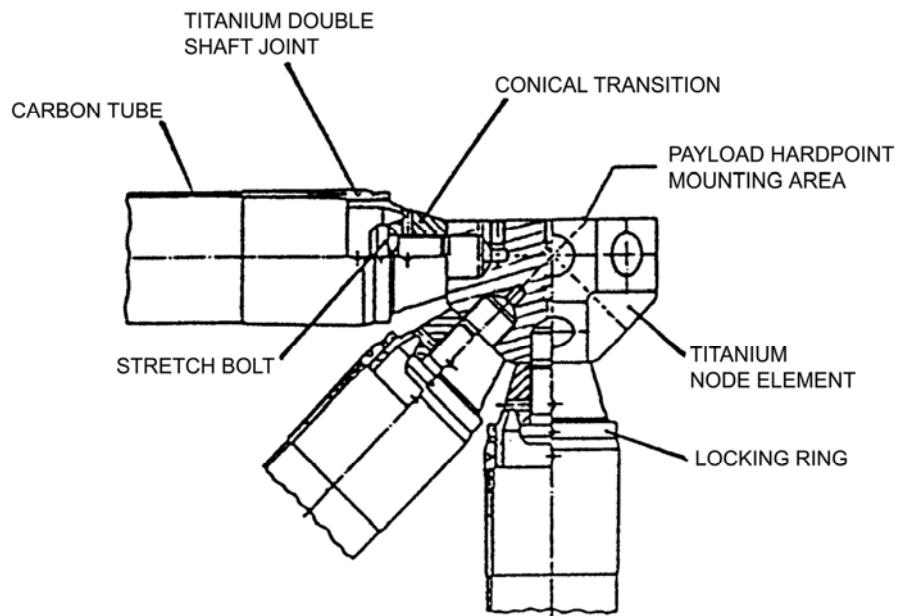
Case study: SPAS - details of joint dimensions
